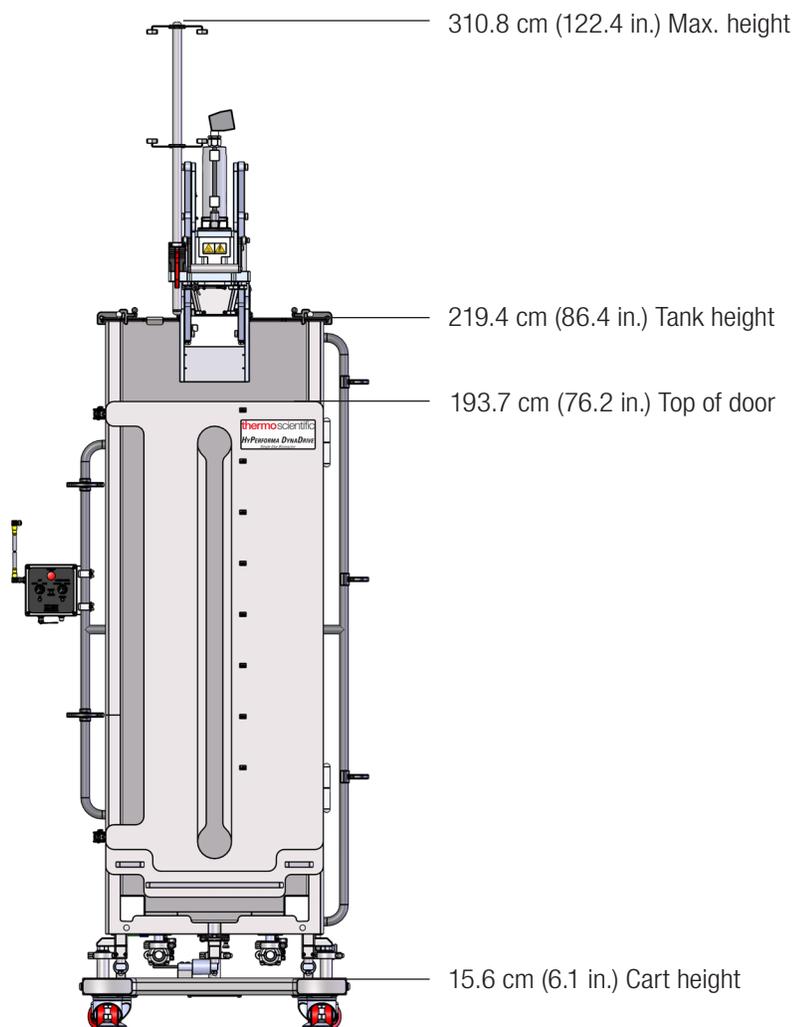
Dimensions of 500 L DynaDrive S.U.B. without optional E-Box (front view).
